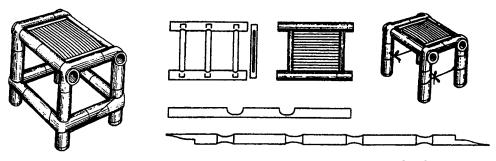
Bamboo Stool Figure 3.89 Sketch Map of Bamboo Stool Making
